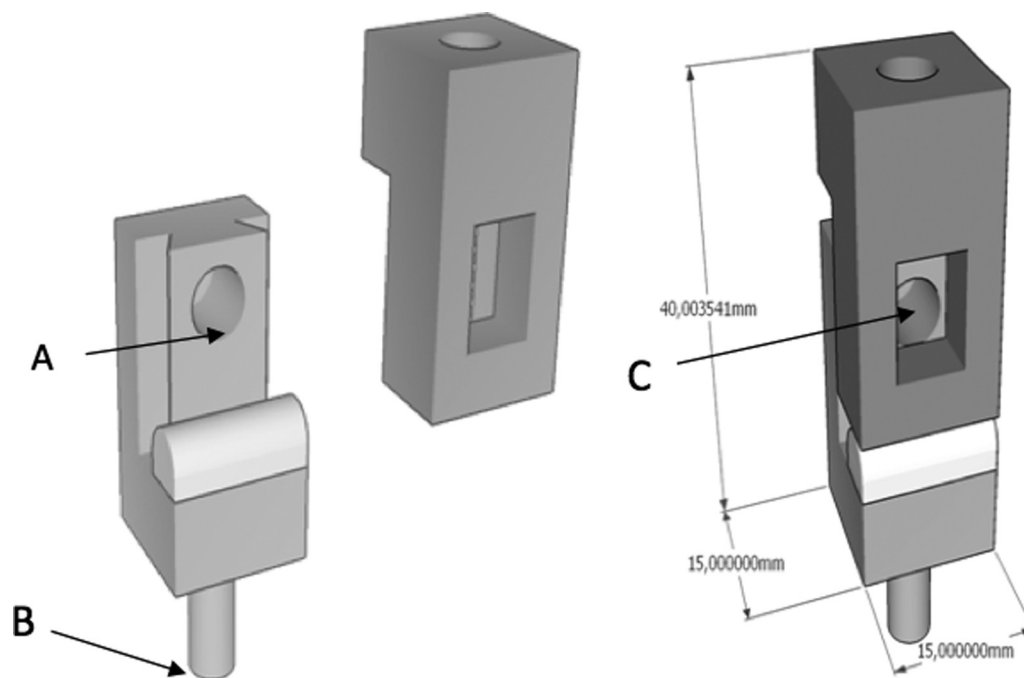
Geometric modeling. (A) Dovetail slide. (B) Threaded rod. (C) Bolt hole.
